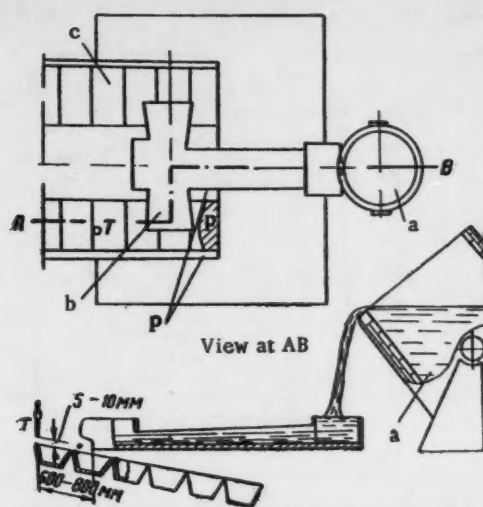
Plan of working area of casting machine and position of apparatus. a) Ladle; b) pouring trough; c) molds of casting strip; T) thermocouple; P) region controlled by photorelay.
